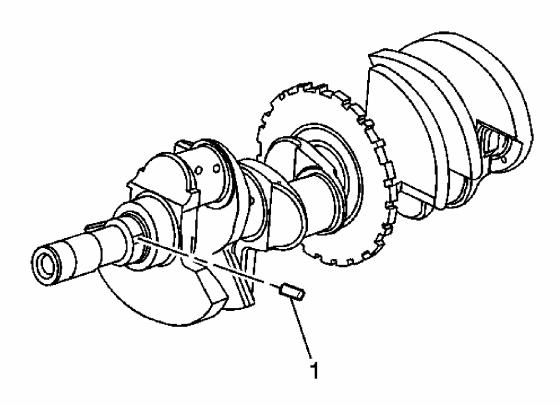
View Of Crankshaft Sprocket Drive Pin Courtesy of GENERAL MOTORS CORP.
